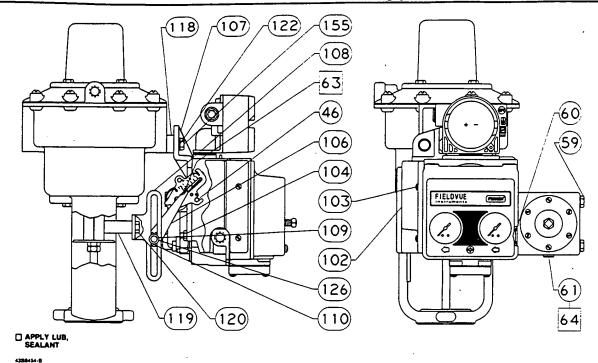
Type DVC5010 Series Digital Valve Controller Mounted on Type 513 Size 32 Actuator with Integrally Mounted Filter Regulator
